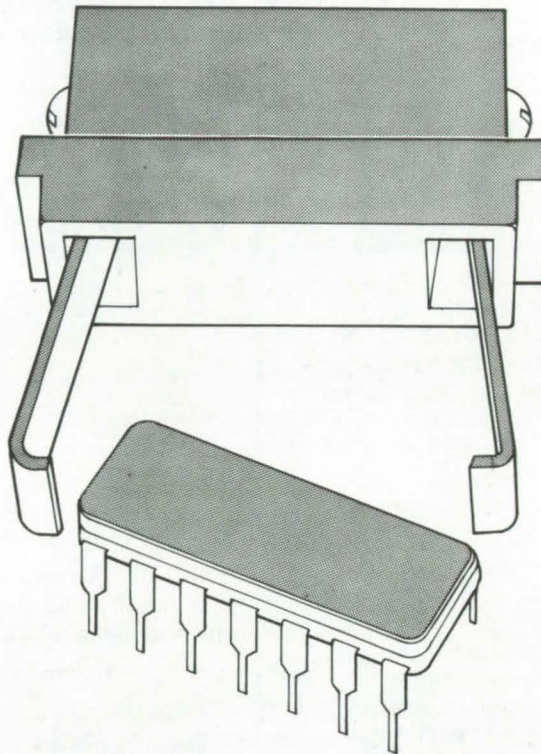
Pin distortion of IC package (foreground) is prevented by using DIP extractor.
